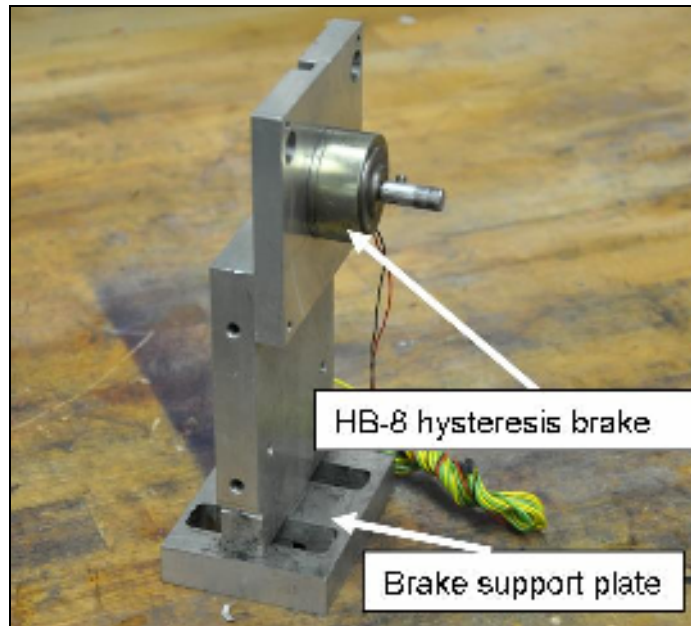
HB–8 hysteresis brake attached to brake support plate.
